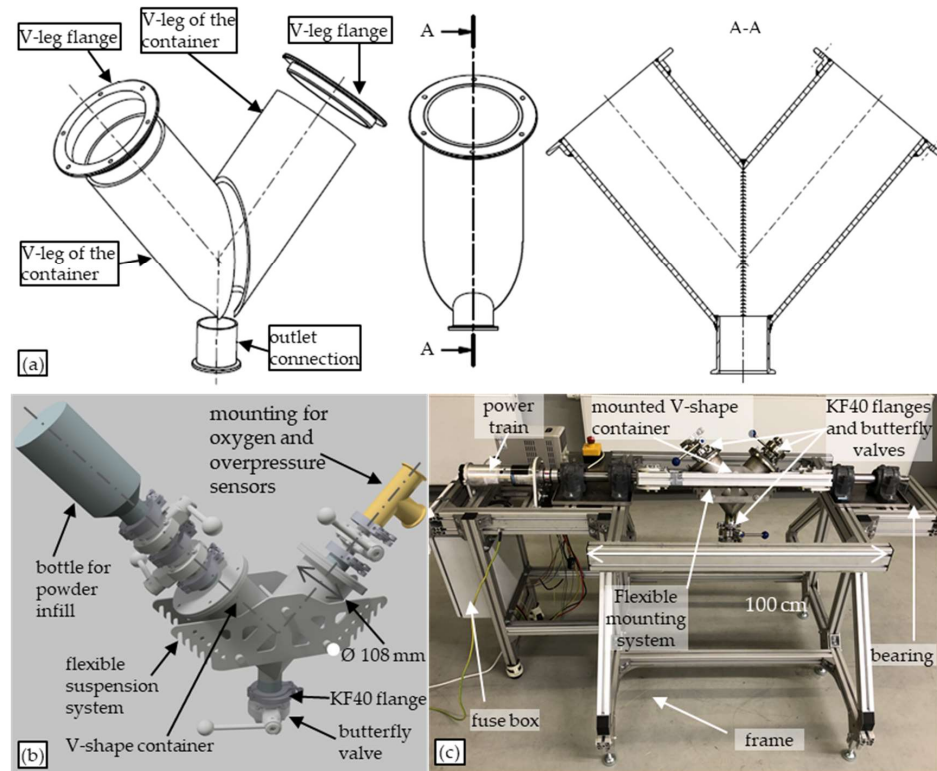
(a) Technical drawing of V-shaped container and cross section; (b) CAD images of V-shaped container with mountings; and (c) image of blender test rig. A means the direction of gas flow.
